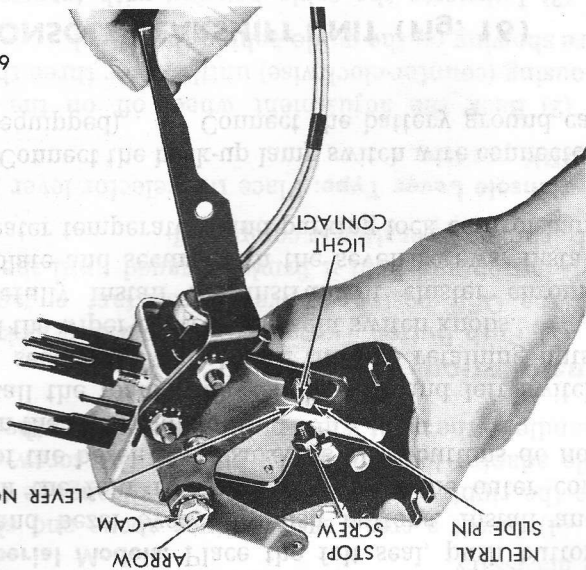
Adjusting Lever Nose Contact at Neutral Slide Pin
